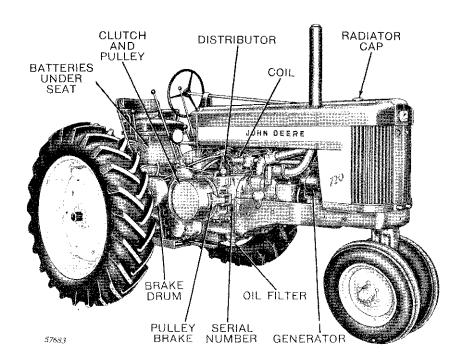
John Deere "720" Series General-Purpose Tractor-Pulley Side
